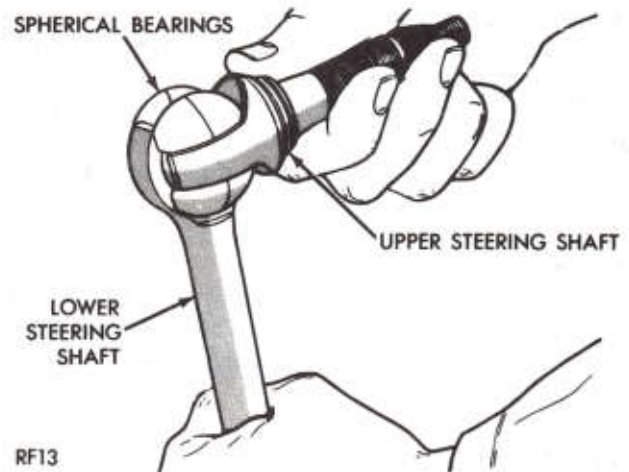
Assembling or Disassembling Steering Shaft Centering Spheres
